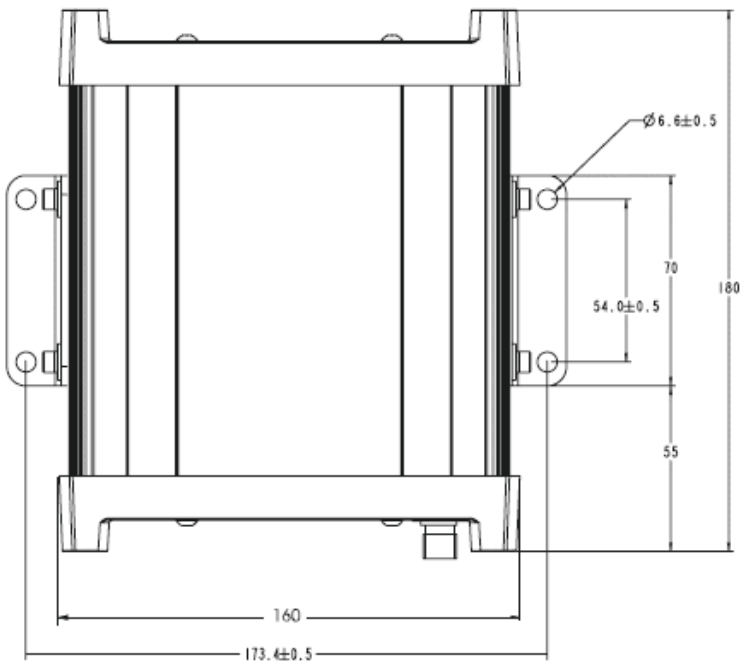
8305HP with Mounting Brackets (dimensions in millimetres)
